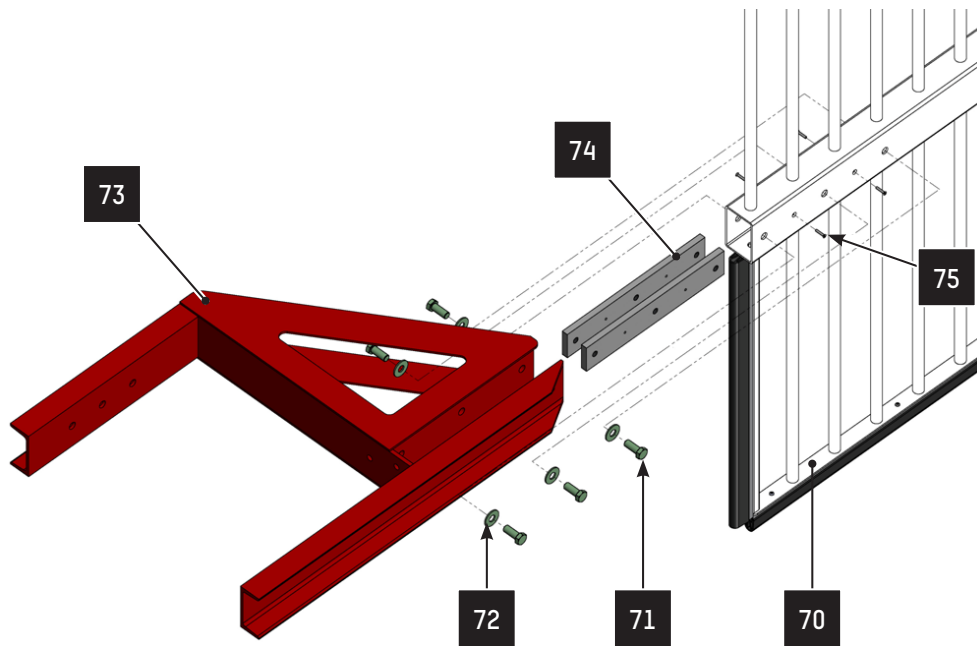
Assembly of the arm with a fixed bar for BL47 - Exploded view
